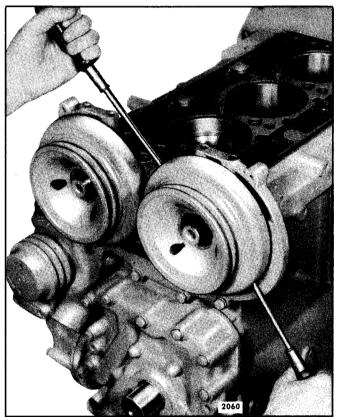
Removing Front Balance Weight (Pulley Type)
